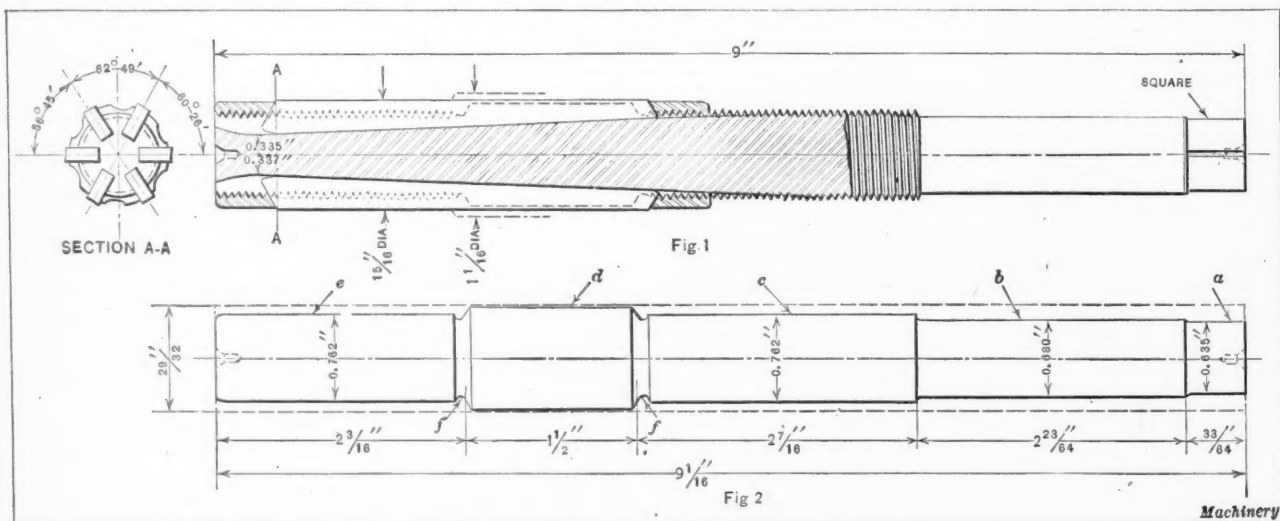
Section of "Quick-set" Adjustable Reamer. Fig. 2. Appearance of Body of Reamer after Fourth Operation
